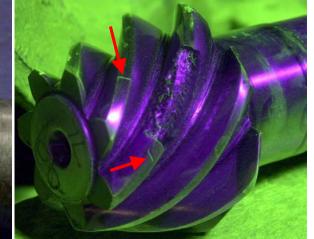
MAGNETIC PARTICLE INSPECTION OF PINION, ARROWS INDICATING CRACKS.
